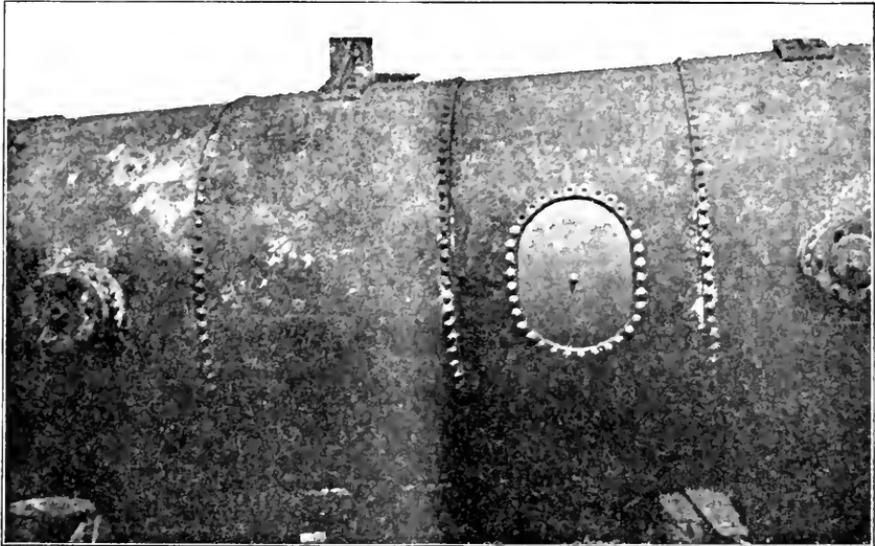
APPEARANCE OF BOILER 303 AFTER TESTING.
